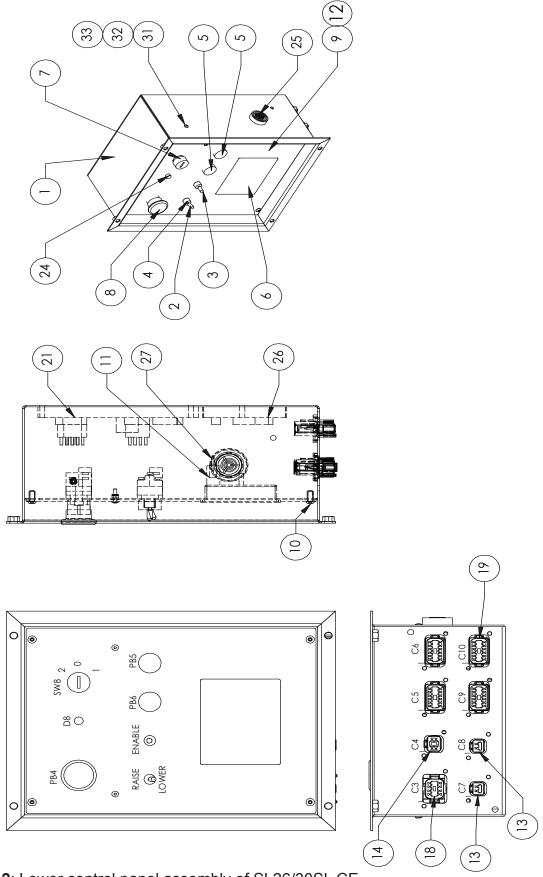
Lower control panel assembly of SL26/30SL CE
